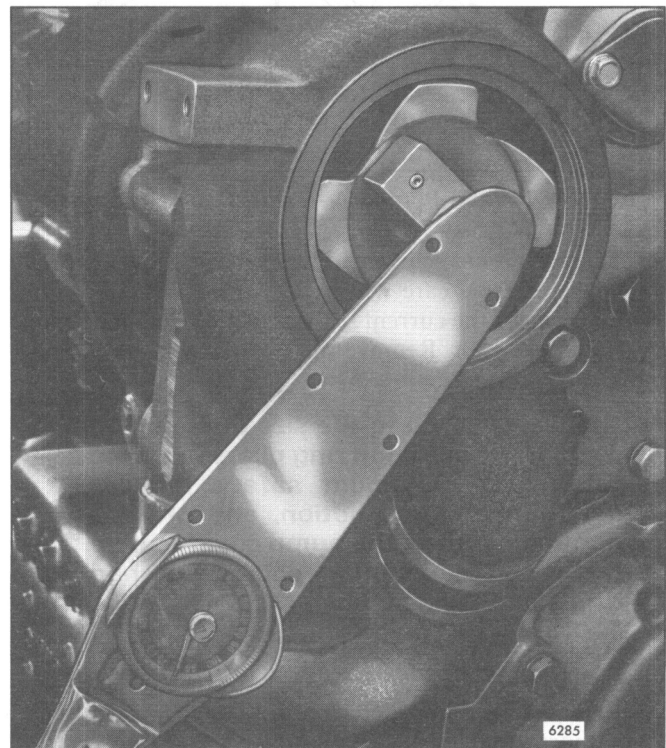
Checking Impeller and Gear Slip Torque with Tool J-33765
